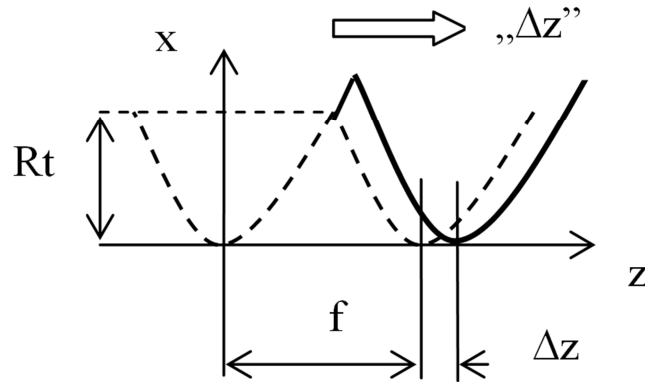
Transversal irregularities with displacement of the tool edge outline parallel to the workpiece's axis "Δz".
